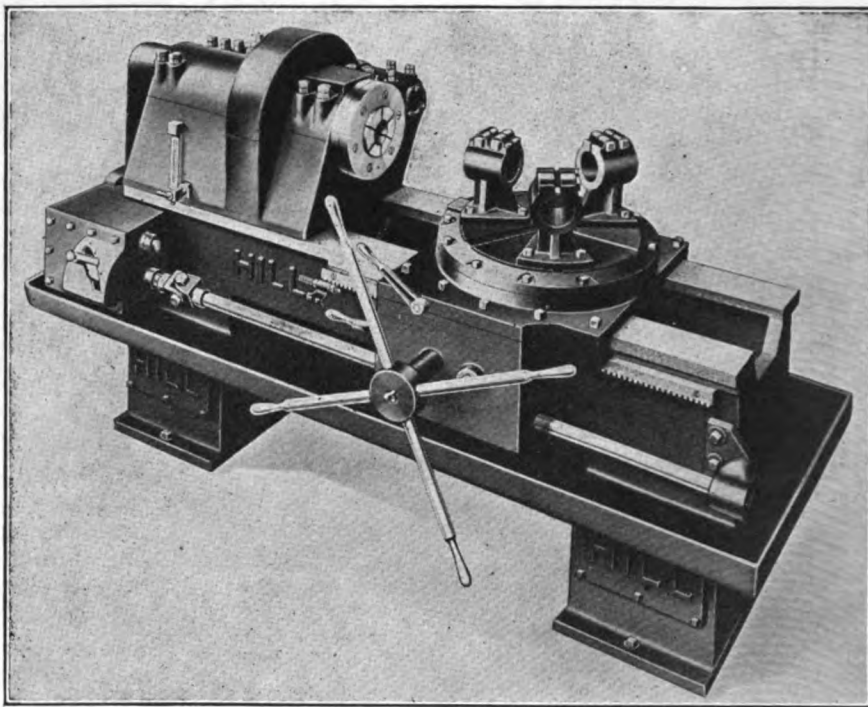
EXTRA-HEAVY PROJECTILE TURRET LATHE
